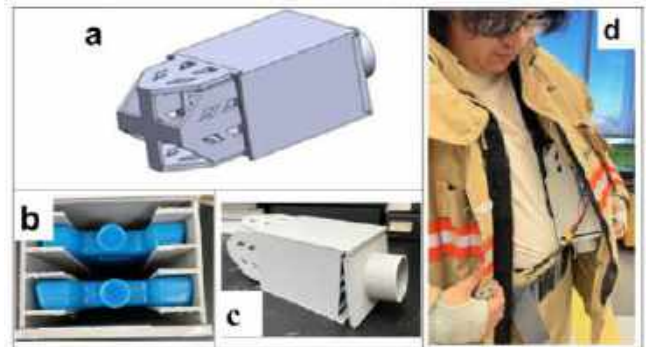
a). SolidWorks assembly of the cooling system, b). Bird's eye view of the inside of the cooling system with cool gel packs, c). Fully assembled model of the cooling system, & d). Cooling device inside of firefighter jacket.
